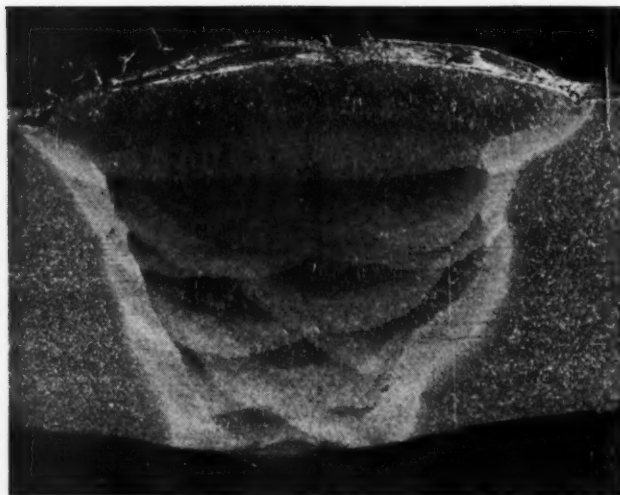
Macrograph section of top portion of horizontal qualification-test weld made during investigation of welding. Magnification $2\frac{1}{2}$ times
